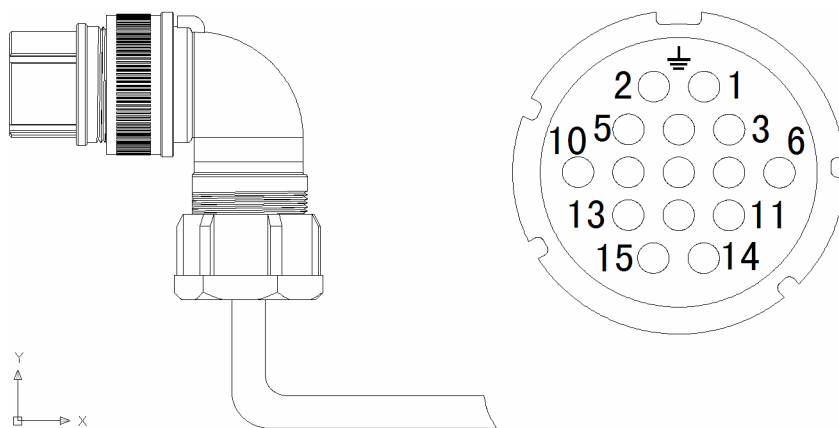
ELESY-130 Series Encoder Aviation Plug Wiring (Plug Side)
